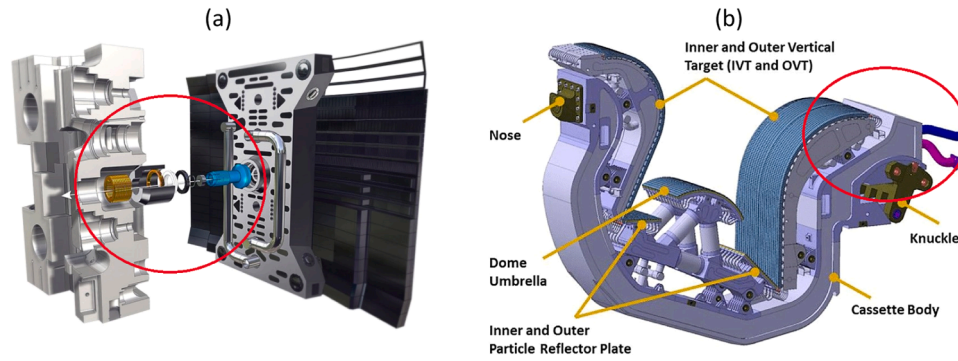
Computer models of the use cases under investigation in this study. Red circles highlight weld location and (a) Use case 1 -Blanket: First Wall to Shielding Block weld on forged machined pipes, (b) Use case 5 - Divertor: First Wall to Shielding Block cooling pipe cap weld.
